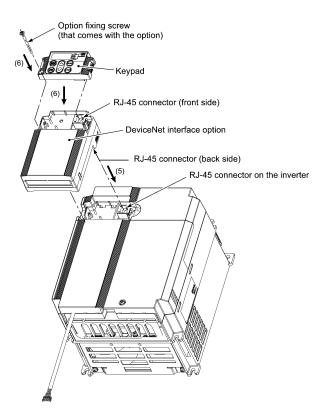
Mounting the DeviceNet Interface Option and the Keypad
